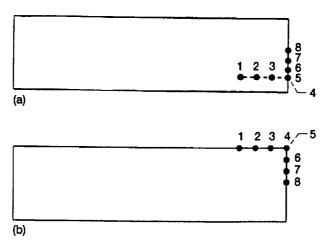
Edge contact caused by $\Delta \gamma$ or $\Delta \lambda_{p,1} = 3$ arc min. (a) Pinion tooth surface. (b) Gear tooth surface.
